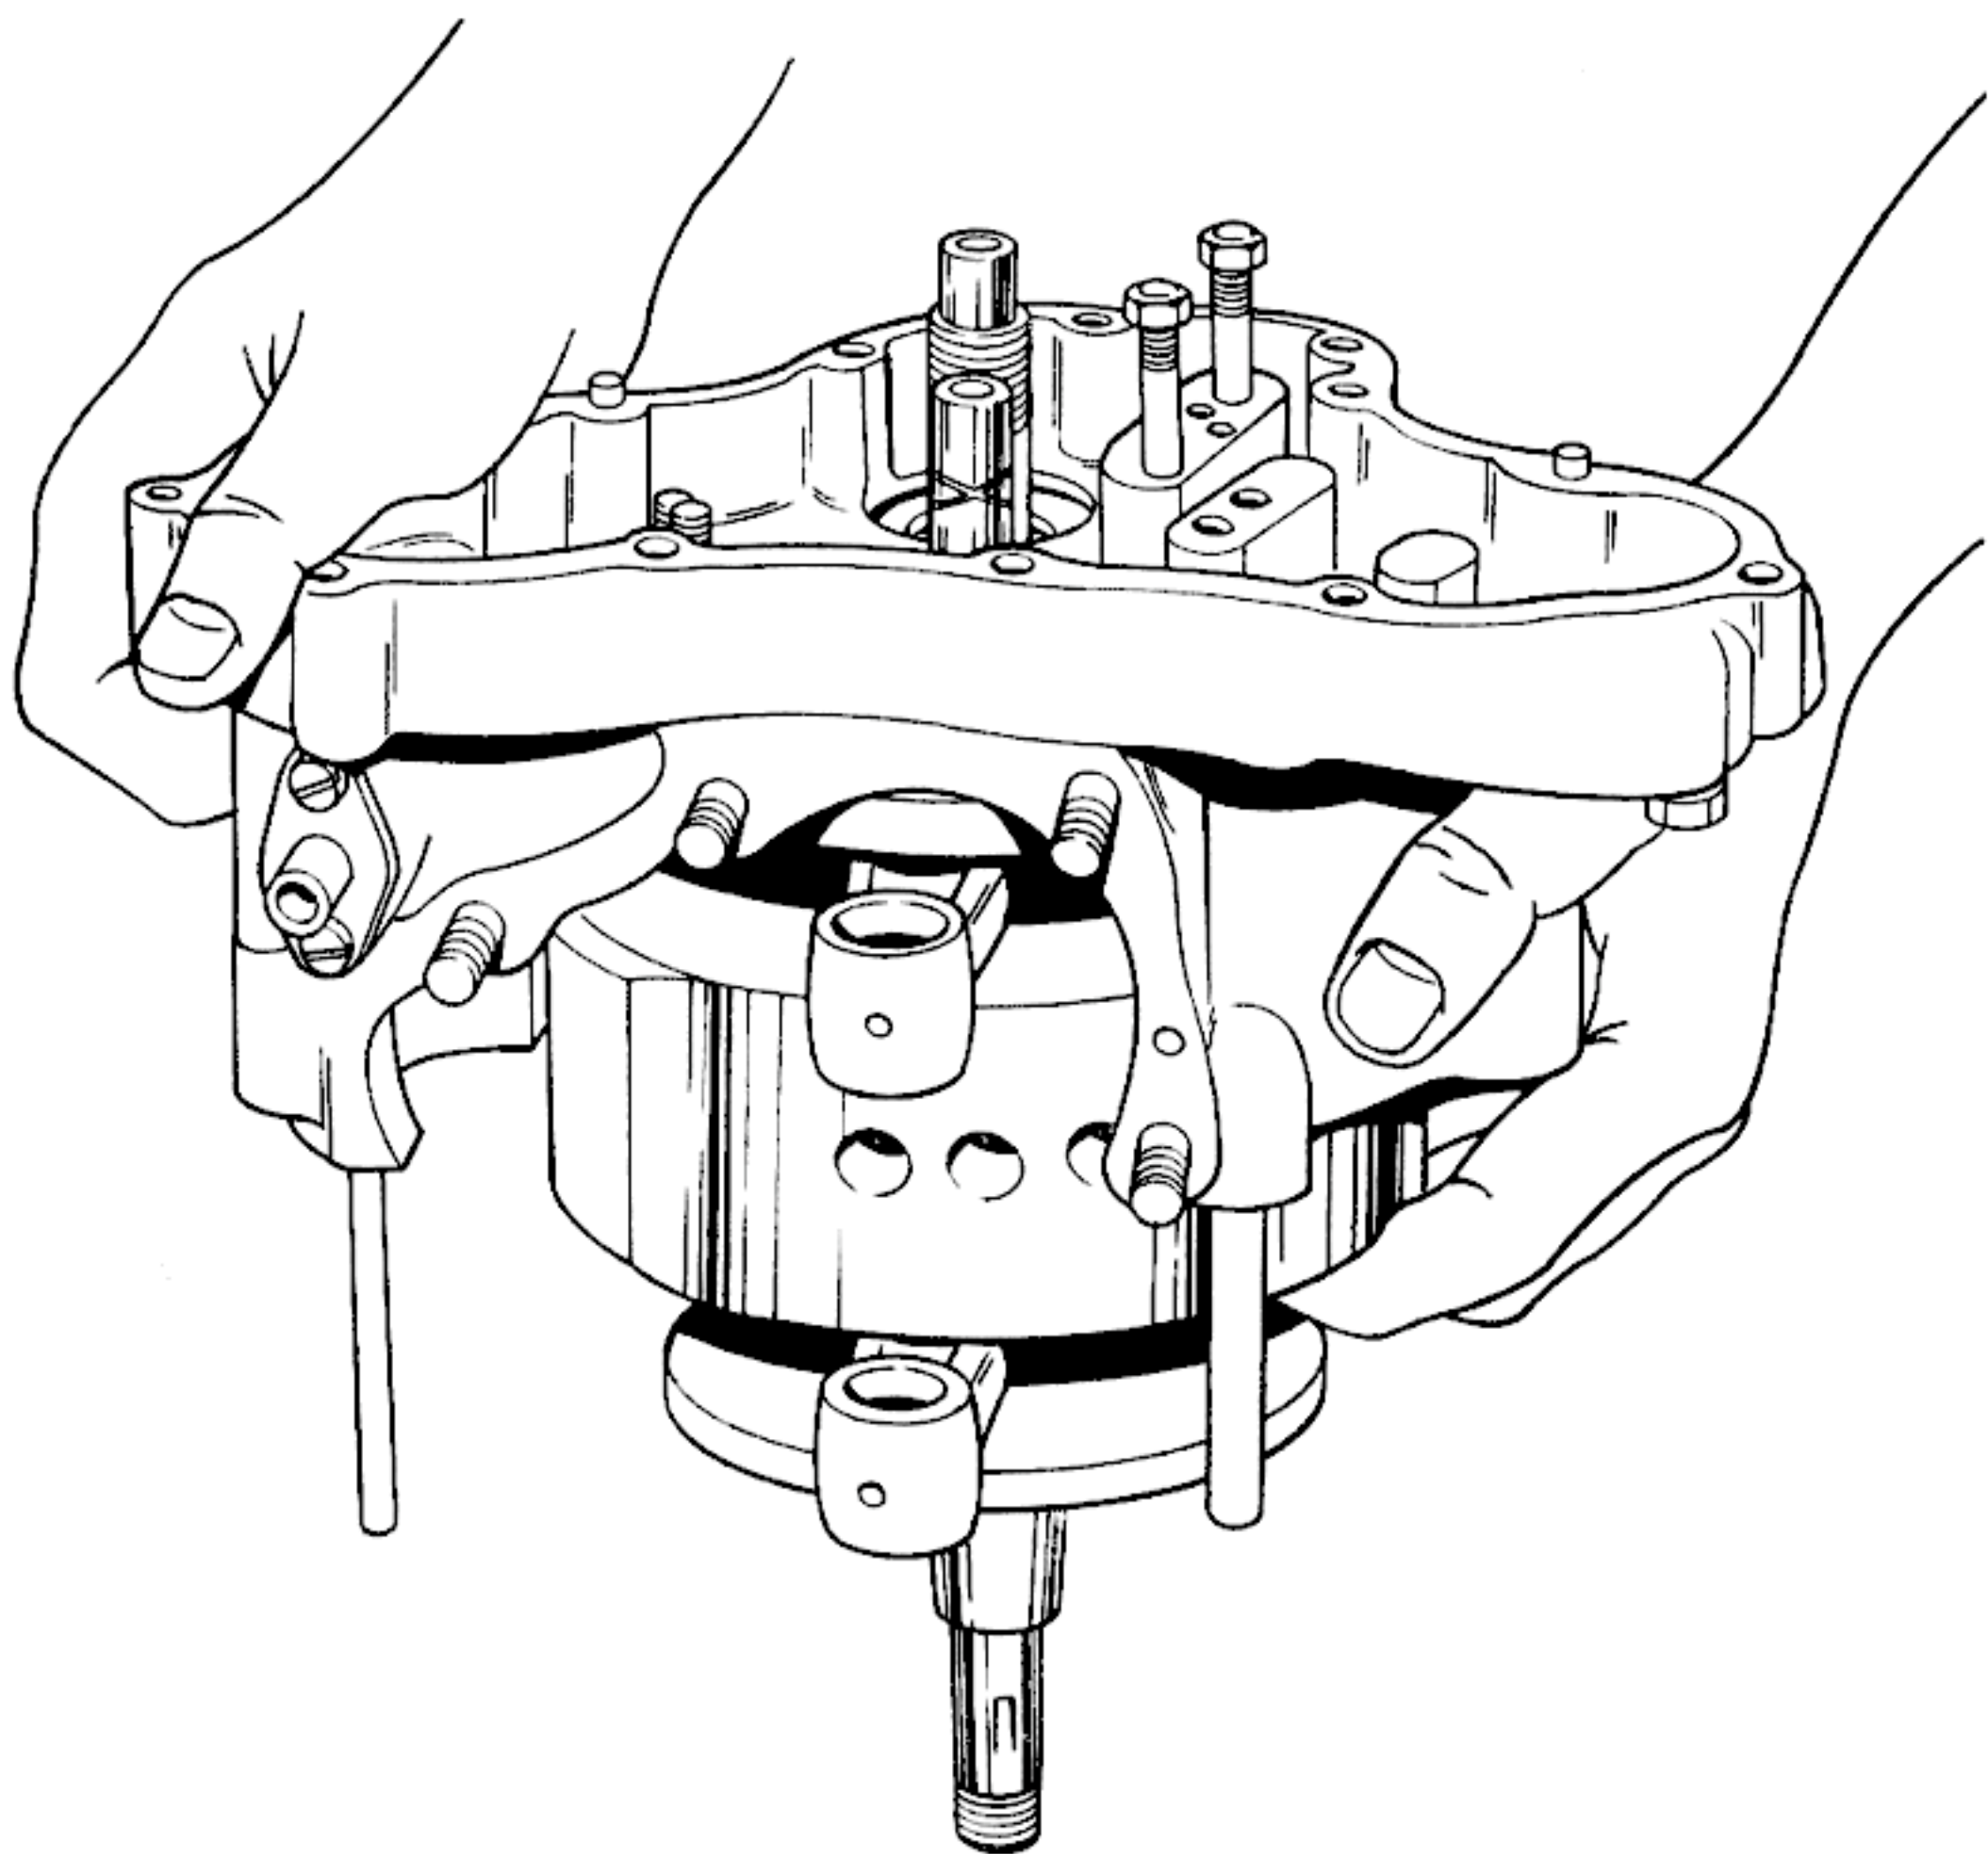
Showing crankcheek to flywheel securing hardware
